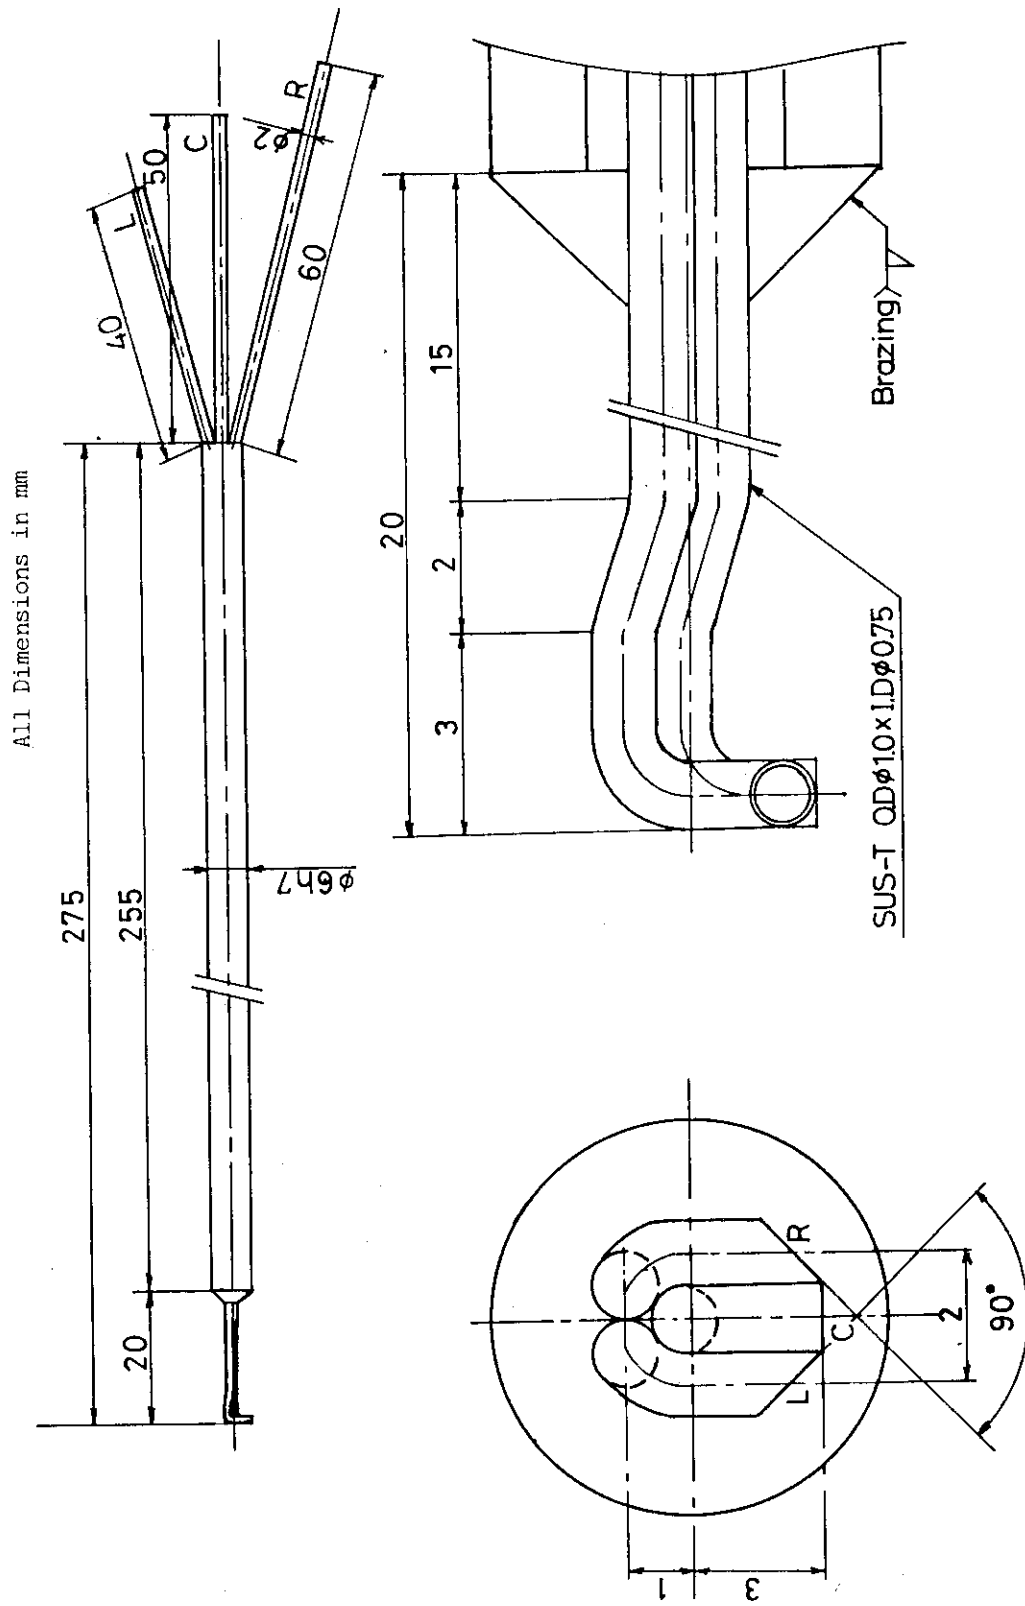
Arrow Head Type Three Holes Yaw Meter
